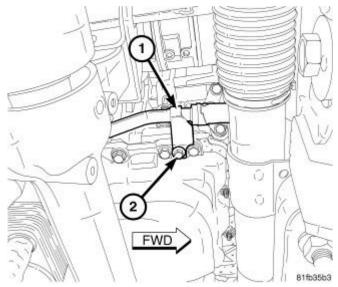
Oil Cooler Line & Bolt Courtesy of CHRYSLER LLC
